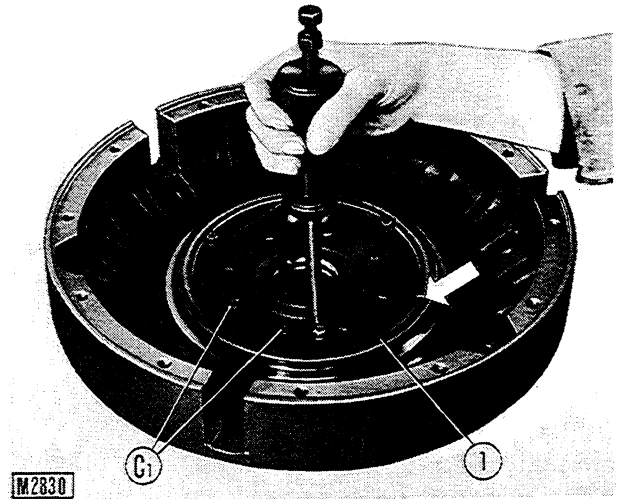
Removing annular piston (1) using slide hammer puller 75291523.
